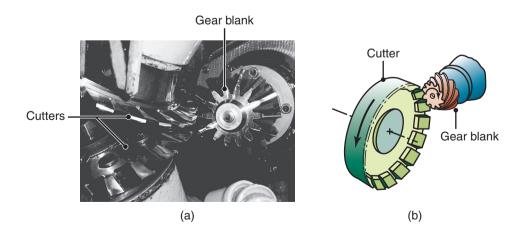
(a) Cutting a straight bevel-gear blank with two cutters. (b) Cutting a helical bevel gear. *Source:* Courtesy of Steve Schmid, with permission from Schafer Gear Works.
